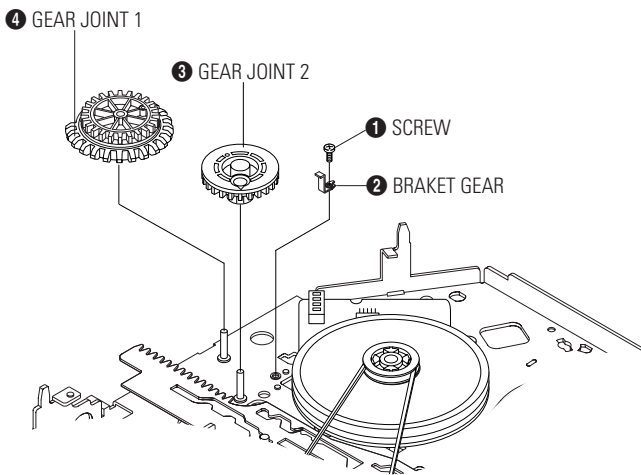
Bracket Gear, Gear Joint 1,2 Removal
